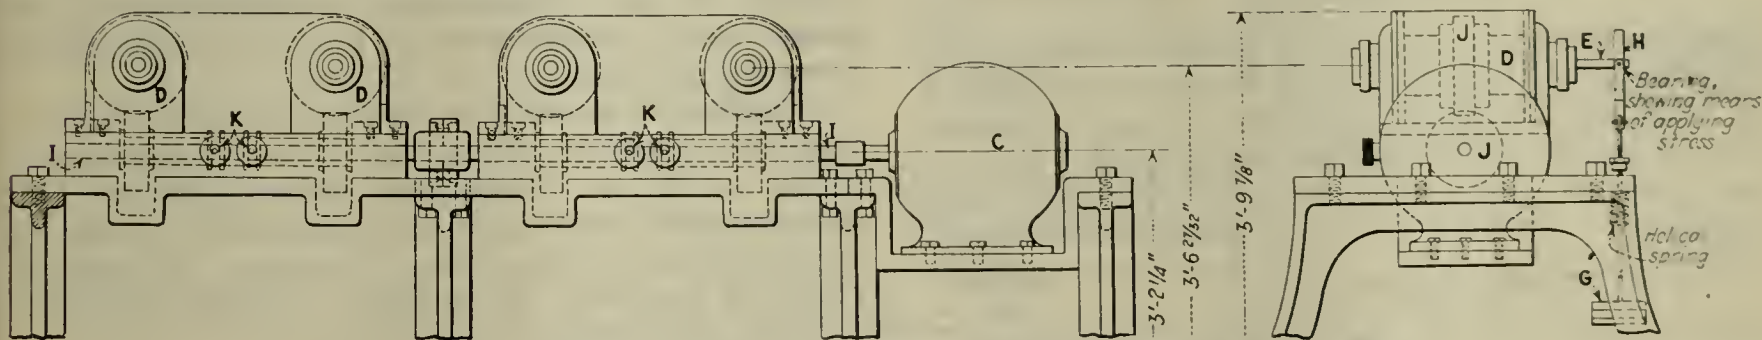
GENERAL DRAWING OF ENDURANCE TESTING MACHINE
